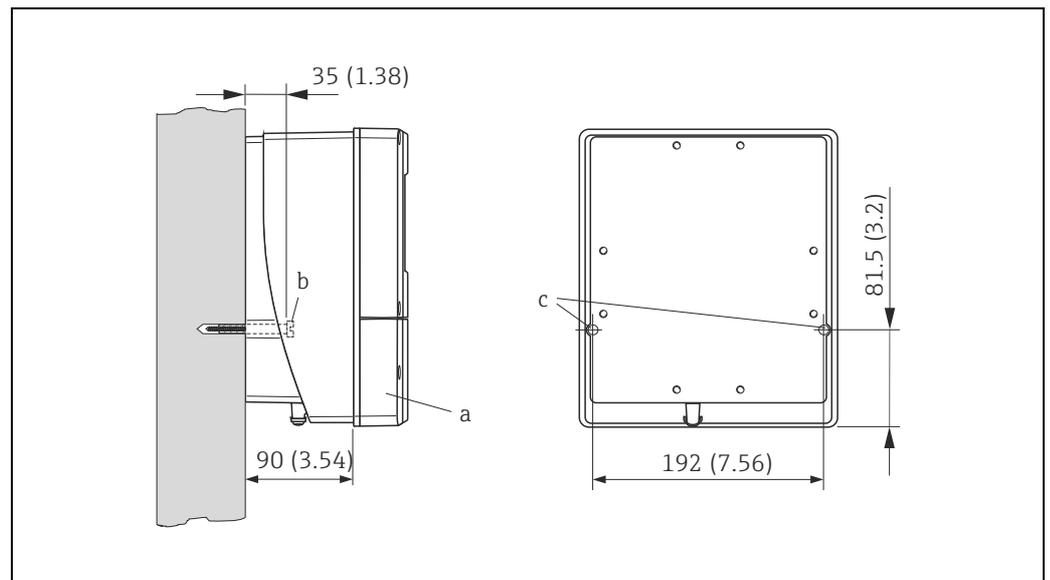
Mounted directly on the wall. Engineering unit mm (in)
